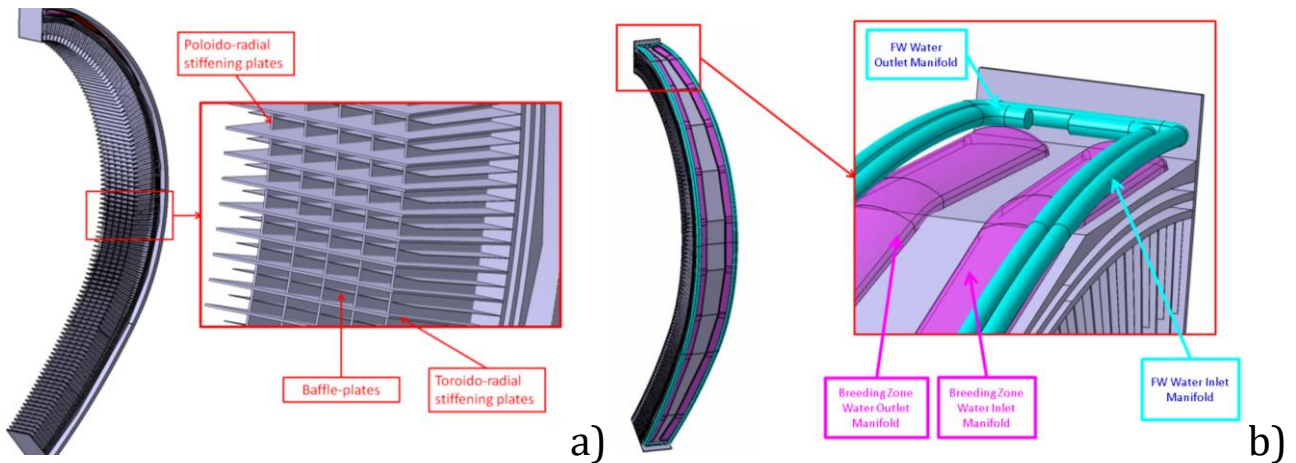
Schematic view of a WCLL segment (reproduced from [3]). (a) Front view, with the detail of the stiffening grids, and (b) rear view (BSS), with the inlet and outlet manifolds for the FW and BZ coolant.
